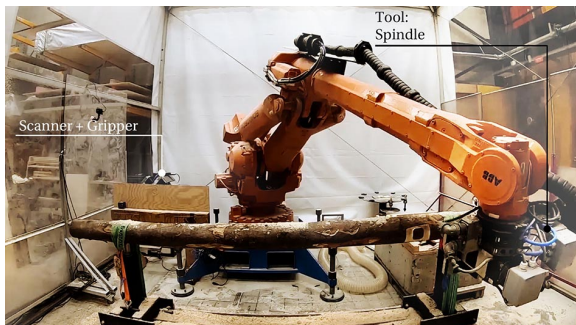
Cutting process using spindle and milling while the scanner and gripper is removed.
